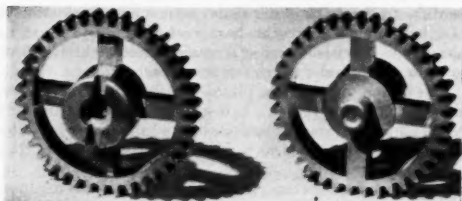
ALTHOUGH REQUIRING COMPLEX TOOLING, THIS LARGE GEAR, WHEN MADE OF IRON POWDER, REPRESENTED A MUCH LOWER COST THAN ITS MACHINED COUNTERPART
